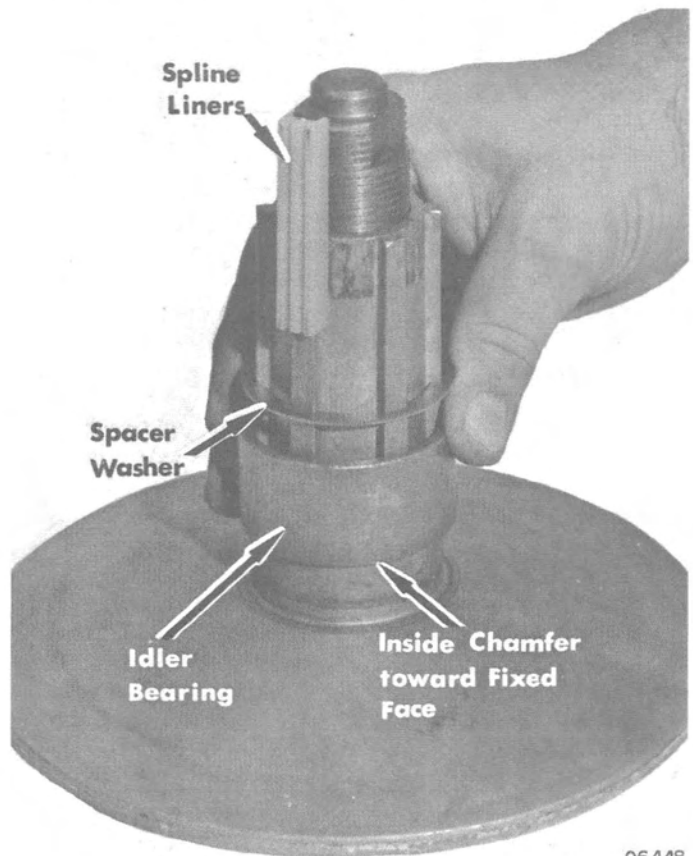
Removing Spline Liners, Spacer Washer and Idler Bushing
